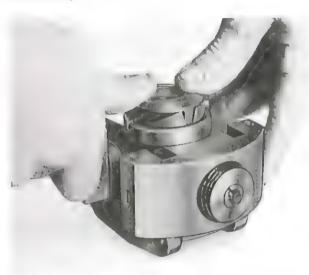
Fitting the vibration damper to the flyweights. (Note relative positions of rubber blocks).
